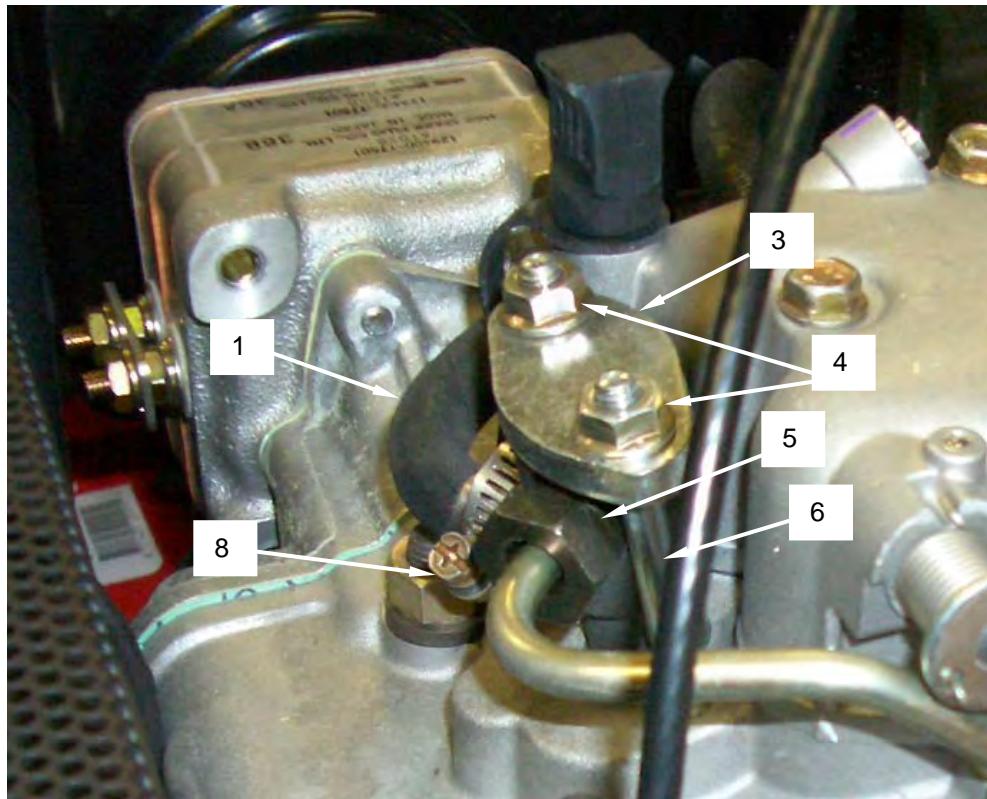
Remove, Inspect, and Install Diesel Engine Fuel Injector (Sheet 1 of 3).
